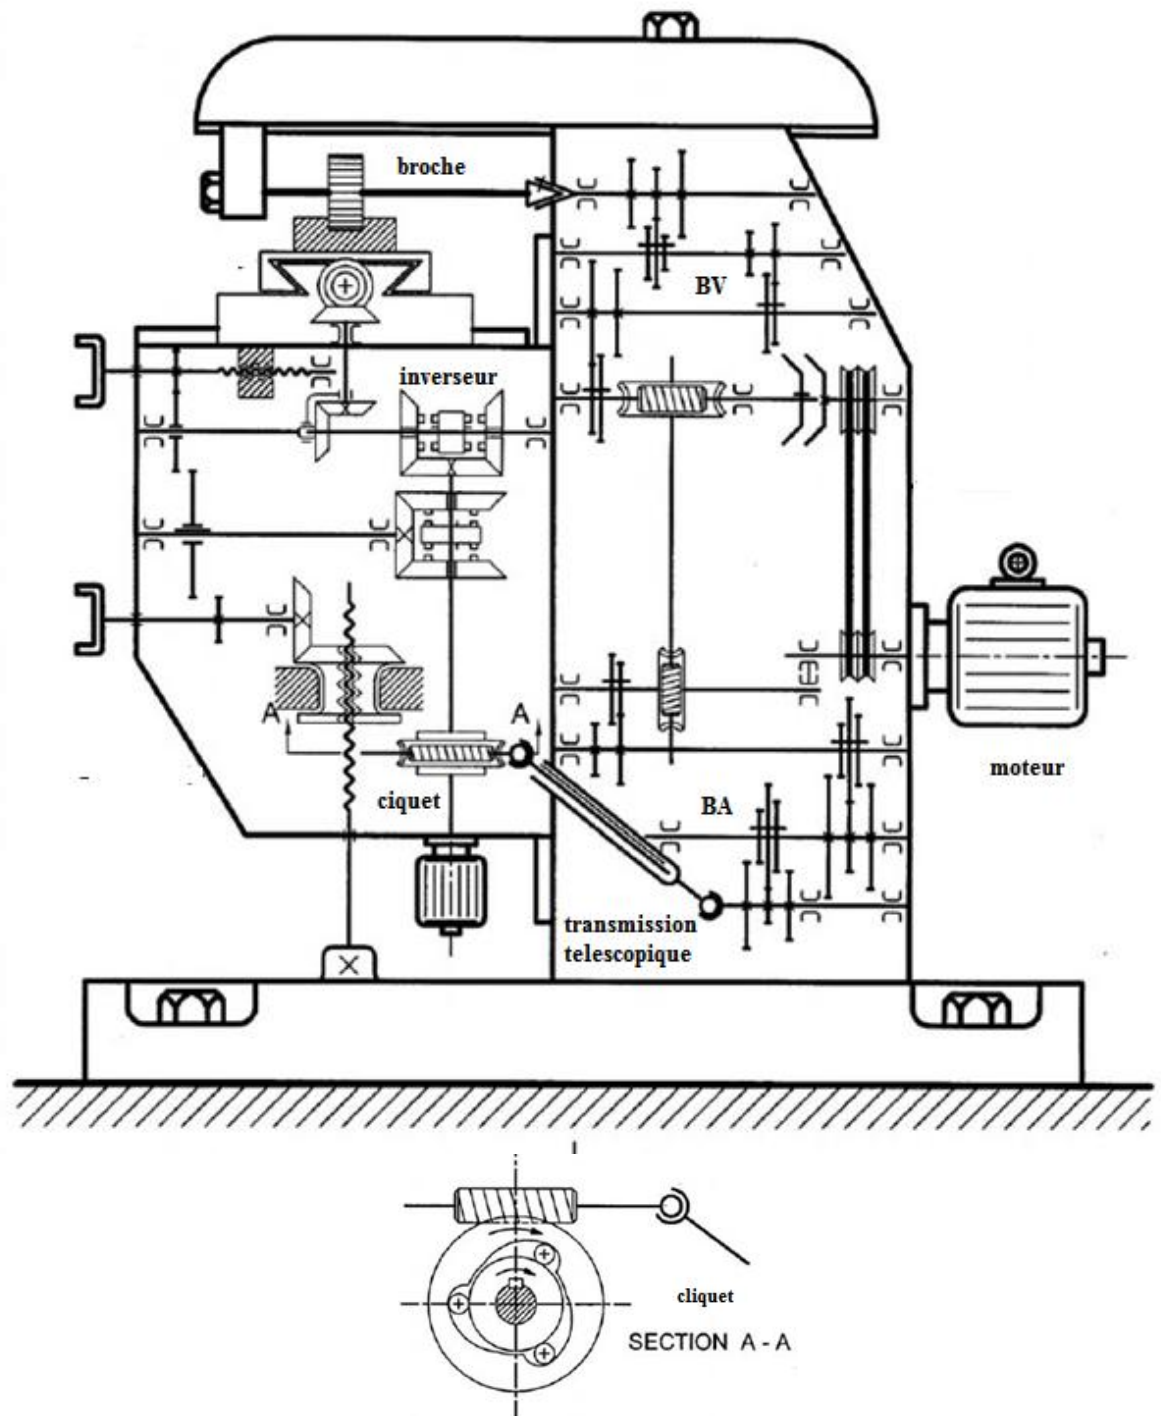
kinematic diagrams of a horizontal milling machine.
